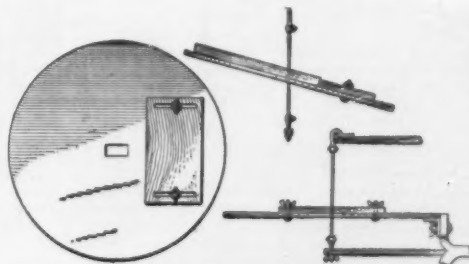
SCROLL SAW ARRANGED FOR CUTTING A BEVEL EDGE.
